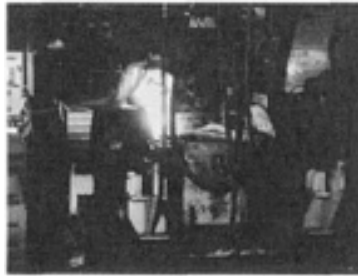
REMOVAL OF FUME WITH A GUN-MOUNTED DEVICE
